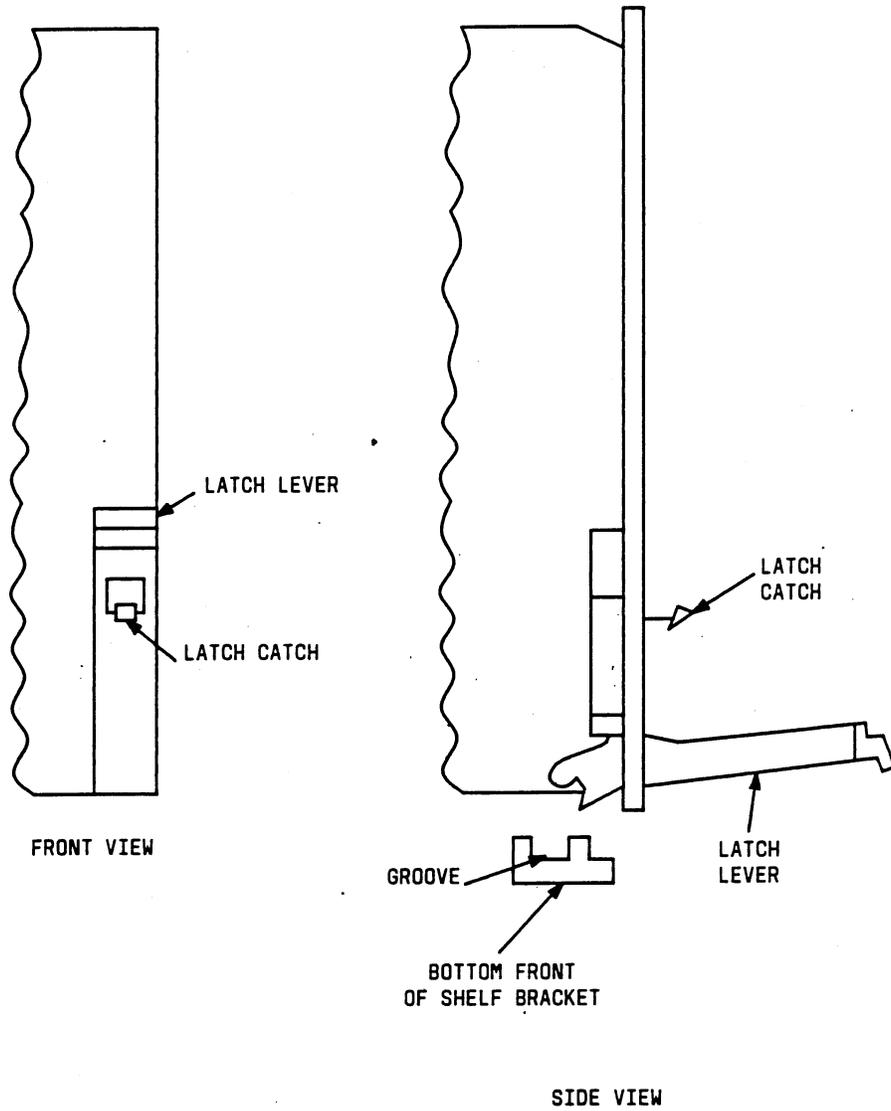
Front and Side View of Typical Plug-In Unit
